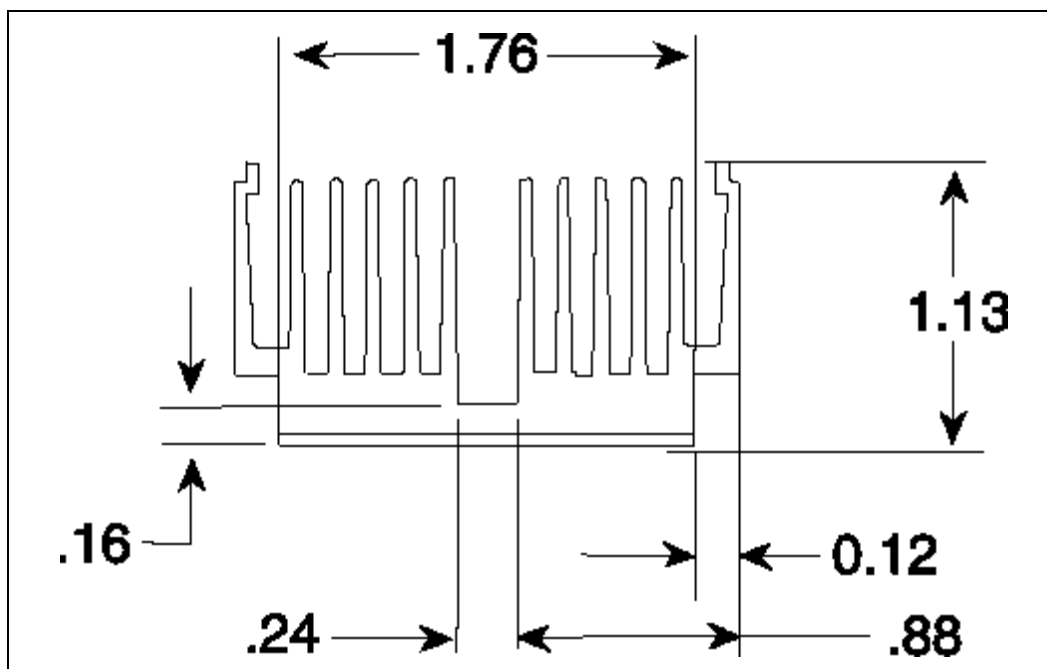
Dimensions of Mechanical Step Feature in Heatsink Base
